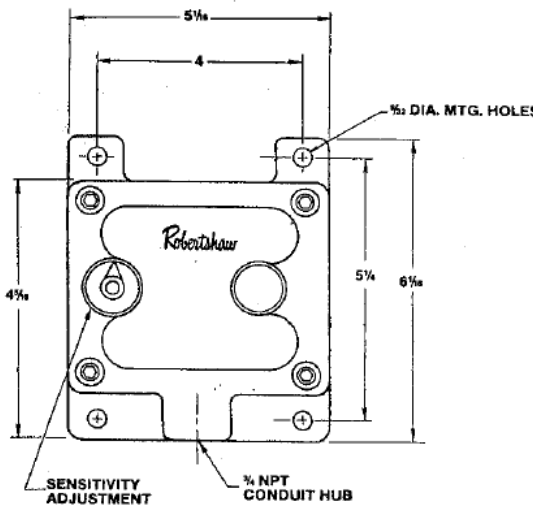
Mounting dimensions for the Vibraswitch Model 375A
